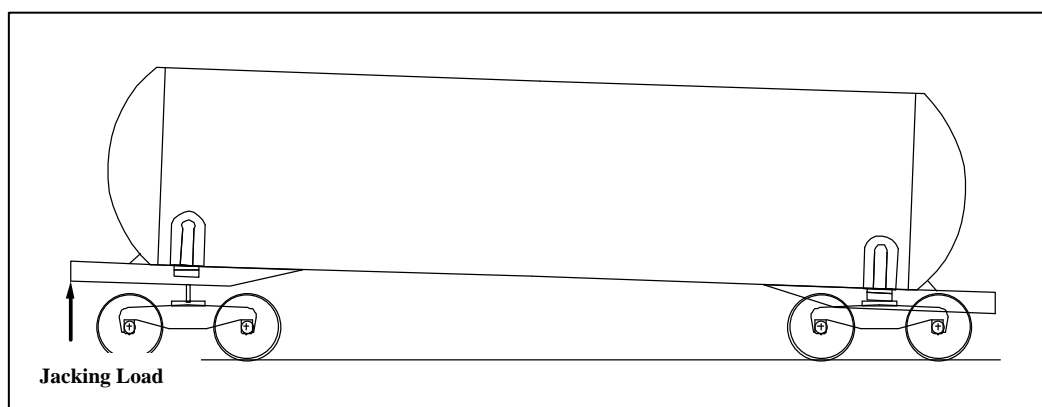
Schematic of Jacking Under the Sill Striker Plate of a Tank Car
